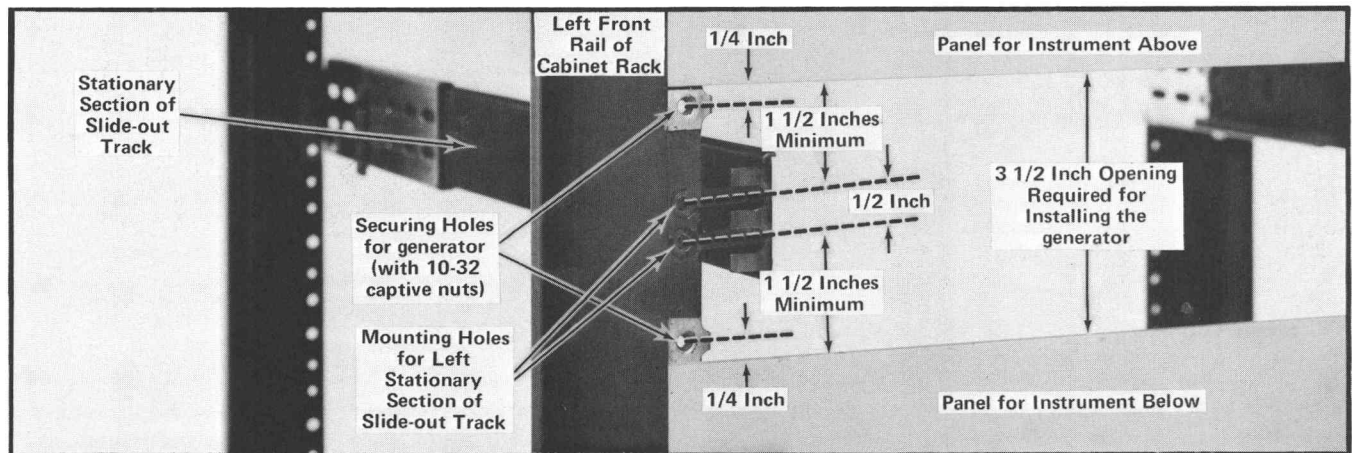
Vertical mounting position of the left stationary section and location of the securing holes. These same dimensions apply to the right front rail.
